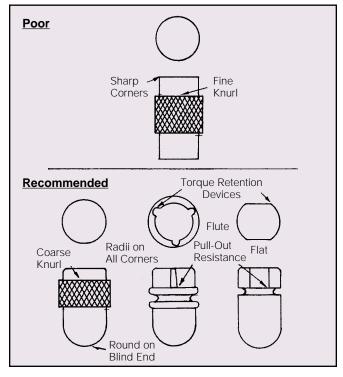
Poor and Recommended Designs for Molded-In Inserts
